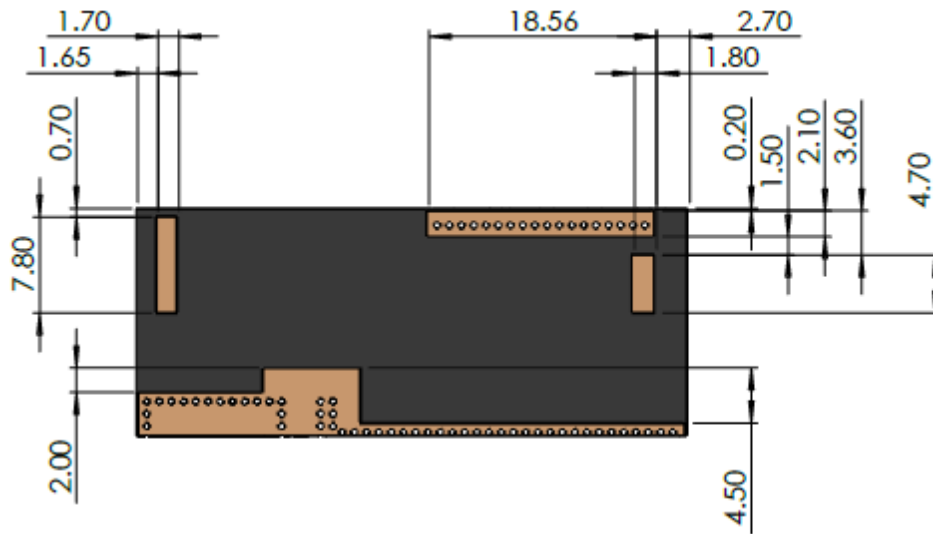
Footprint of the AC31700-01B on the bottom PCB layer. The booster element has one pad with vias to connect to the top PCB layer.
